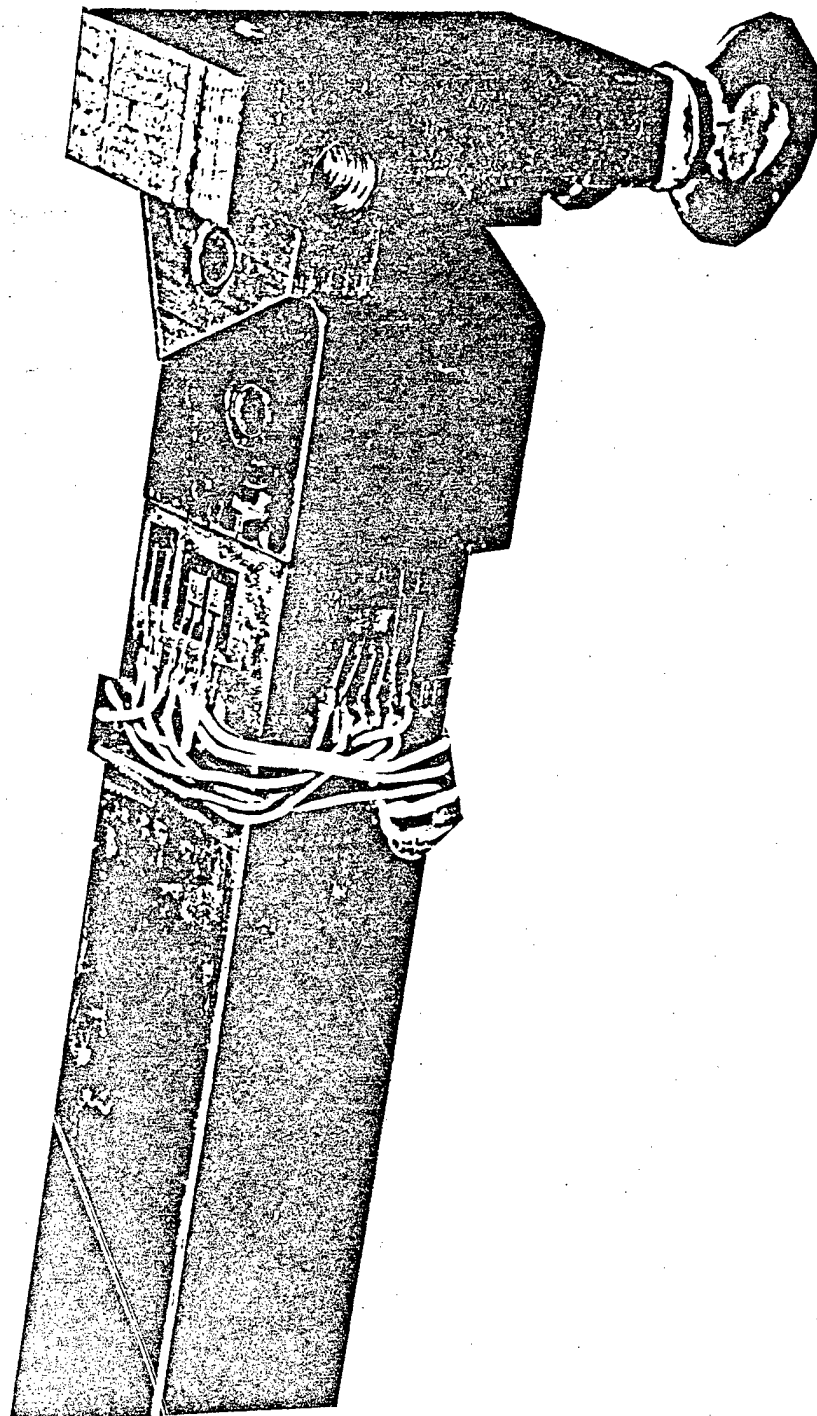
INSTRUMENTED TOOLHOLDER WITH STATIC CALIBRATION FIXTURE INSTALLED
